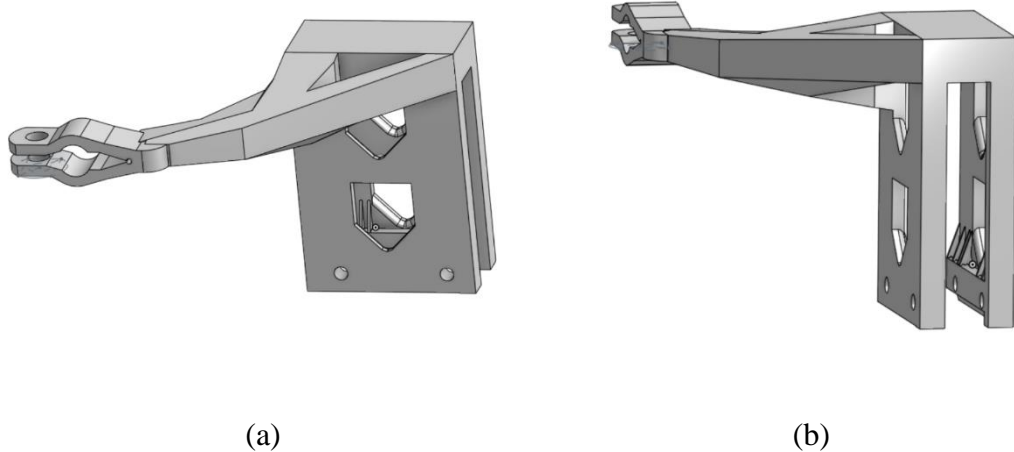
Moving rotary encoder holder. (a) Side view, (b) Back view
